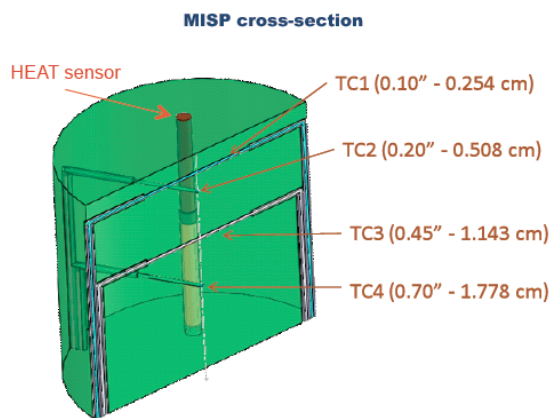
MISP (MEDLI Integrated Sensor Package) plugs incorporate both recession and thermocouple sensors into a single plug [3]
